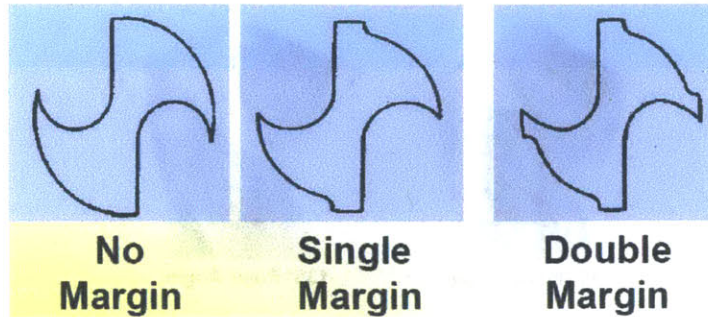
Cutter Cross-Section Indicating Margins¹¹
